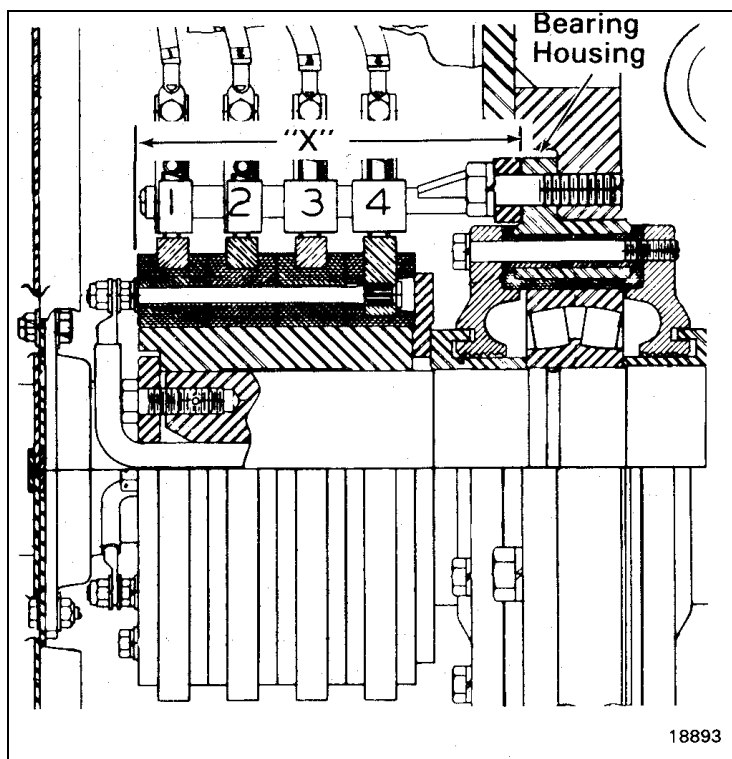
Model AR10 Small Bearing "X" (Protrusion) Measurement
